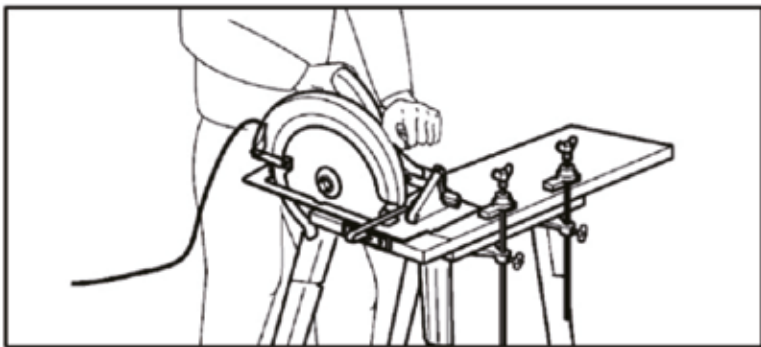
A typical illustration of proper hand support, workpiece support, and supply cord routing.
